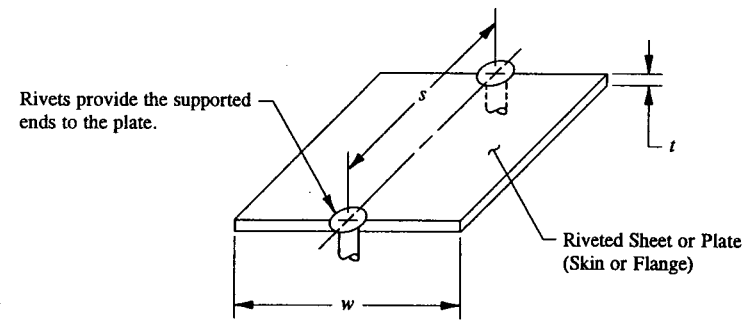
A riveted sheet or plate idealized as a column between rivets.
